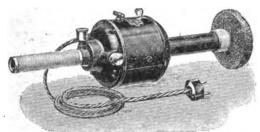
ELECTRIC HAND GRINDING MACHINE.
